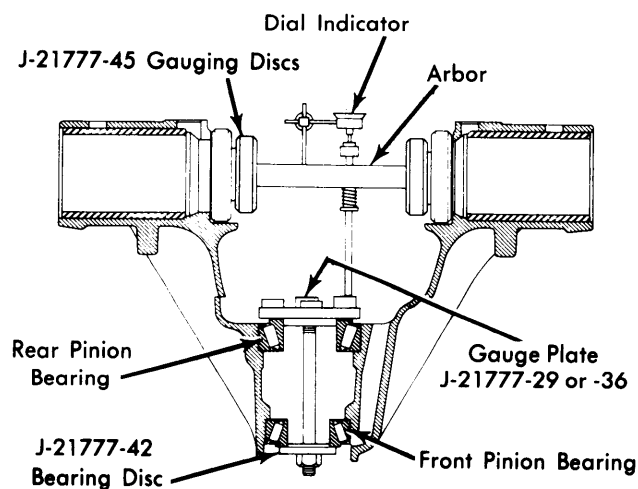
Sectional View Showing Use of Pinion Depth Tool Set J21777
